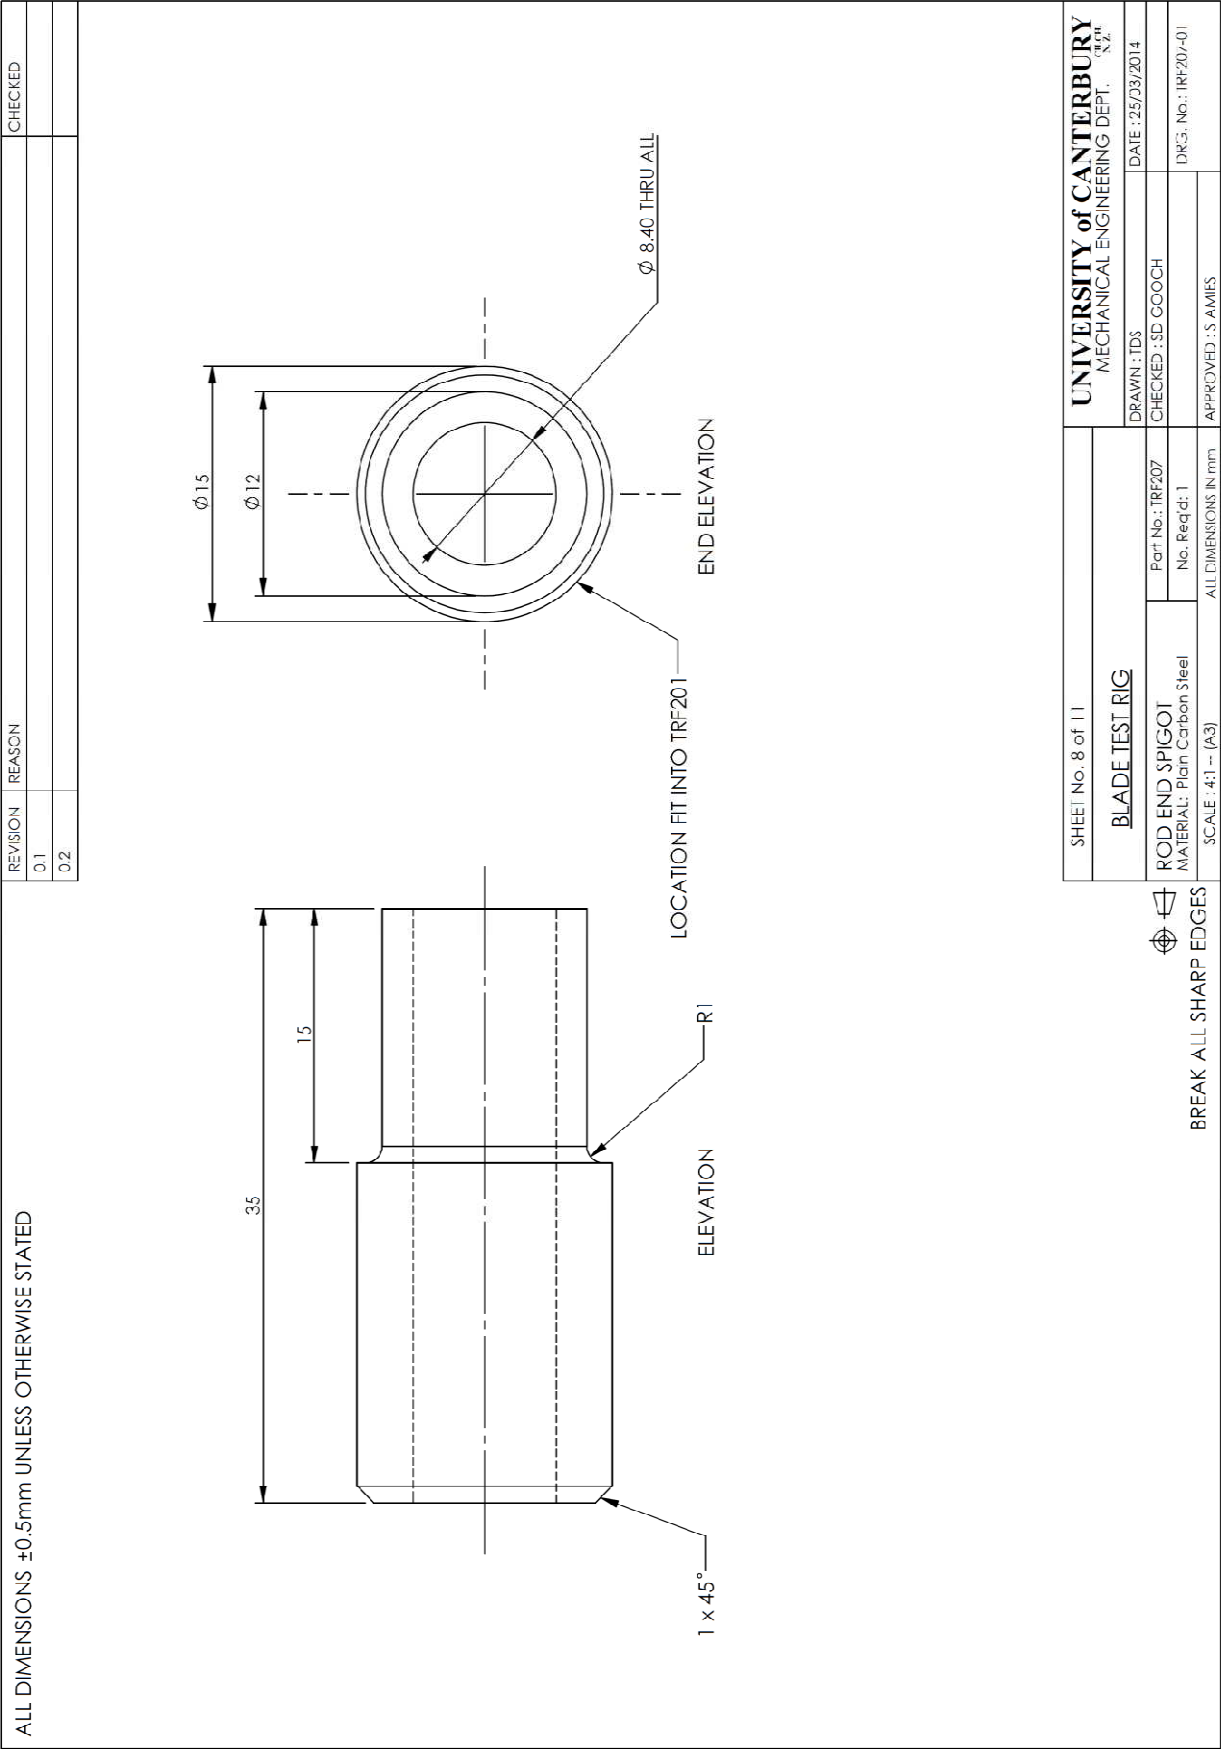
Manufacturing drawing of rod end spigot in fatigue test rig.
